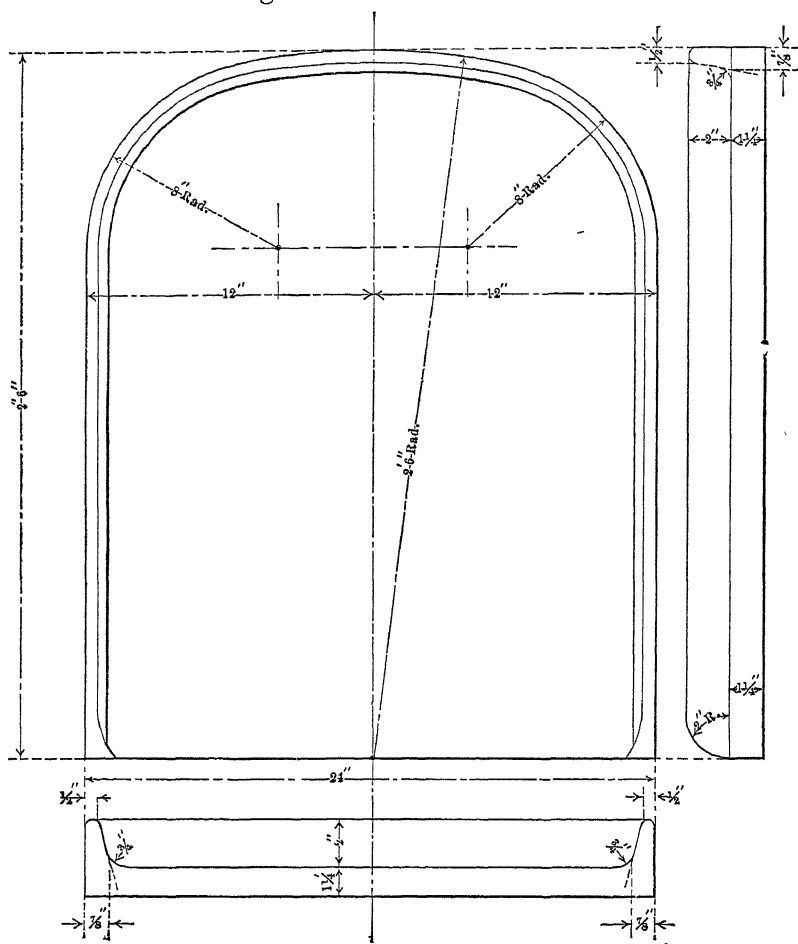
GRINDING-PLATE FOR FINISHING ORE-SAMPLES.
